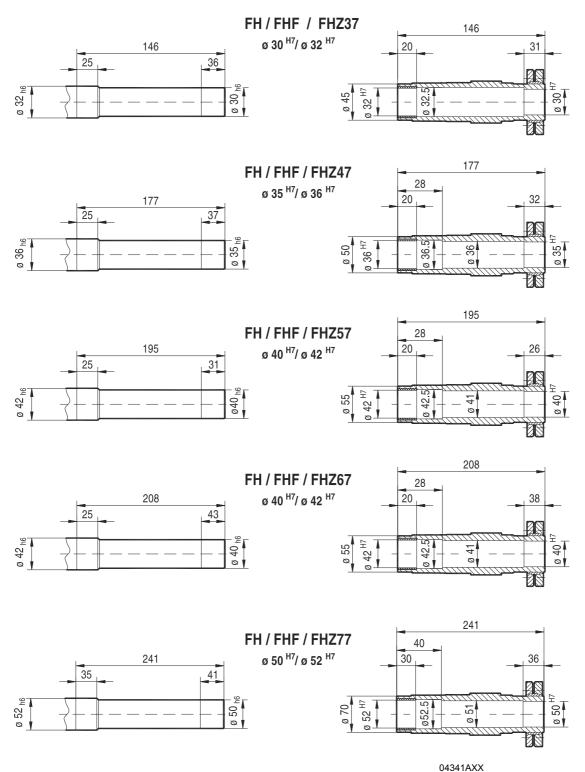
Shouldered hollow shaft FH/FHF/FHZ37...77
